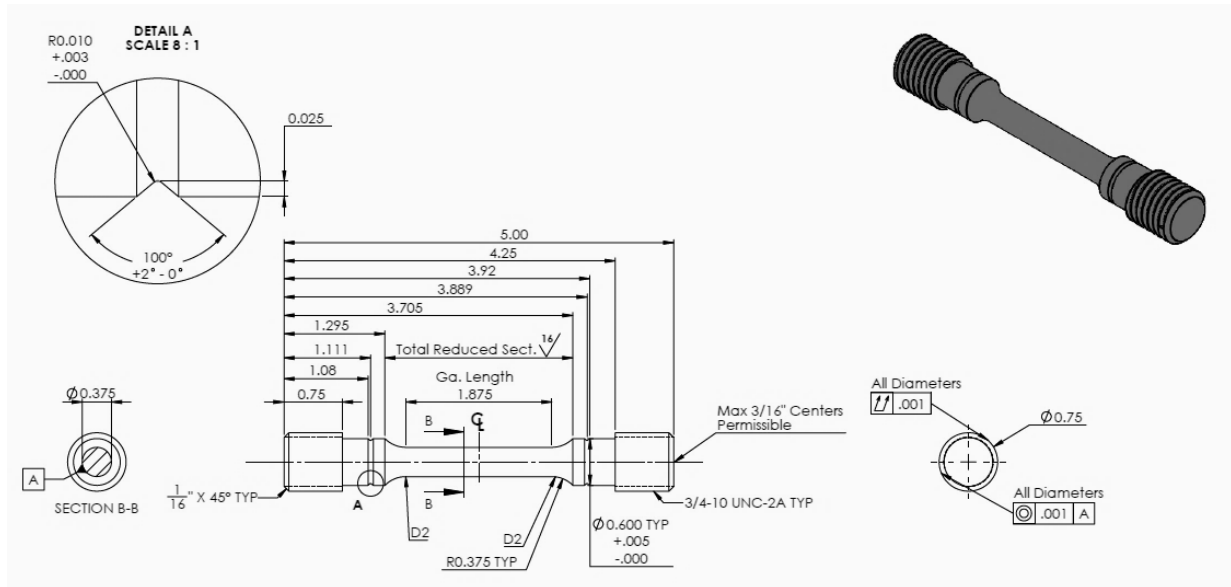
Alloy 709 cross-weld creep specimen geometry
